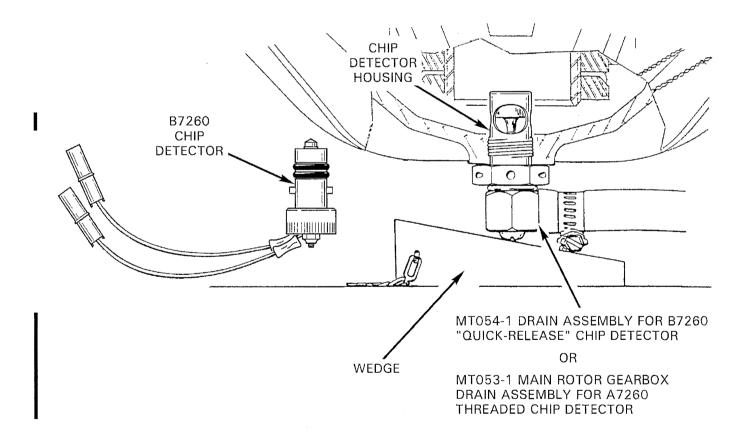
DRAINING MAIN ROTOR GEARBOX
